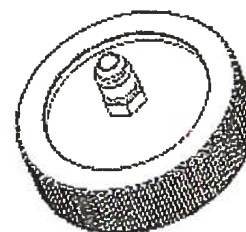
Model PDA-D2 Pneumatic Actuating Adaptor.
